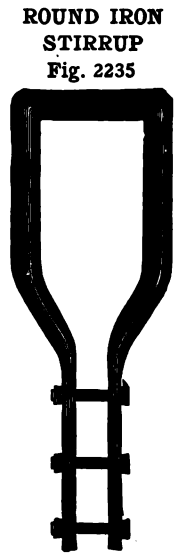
DETAILED PARTS OF STANDARD RIG—RIG IRONS
